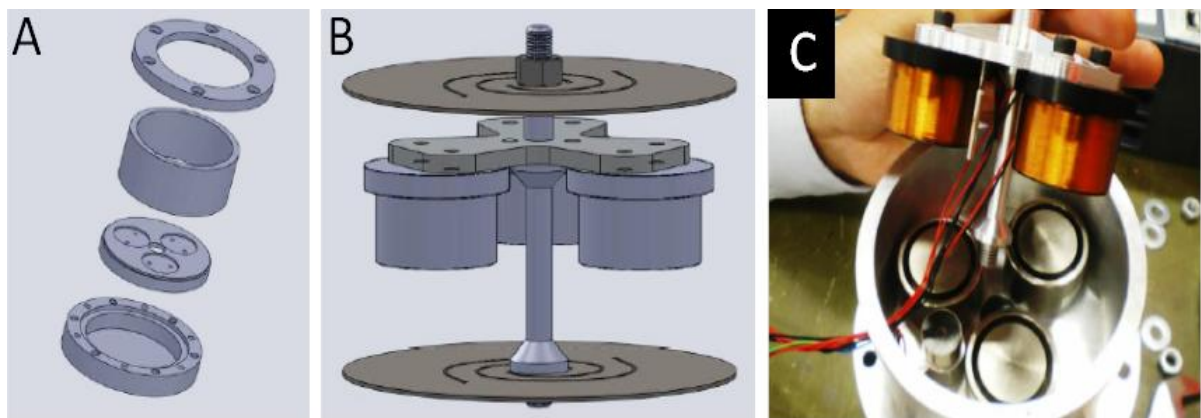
From left (a) Design concept of main frame (b) moving parts with concentric springs and (c) internal view of the assemble actuator with LVDT
